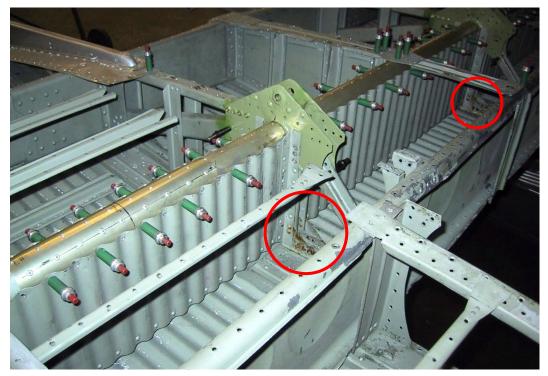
Horizontal stabiliser with severely corroded joints (1), bearing bracket (2) and panelling. Photograph provided by Ju-Air.
